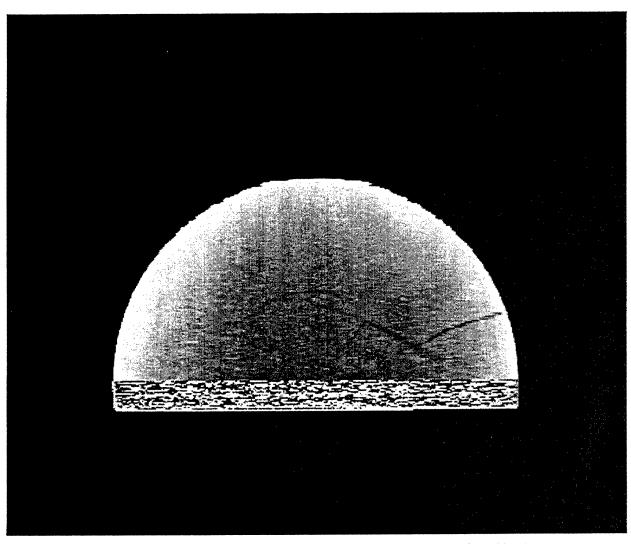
11.39 mm from bottom of disk with 65° rotation about X-axis.
